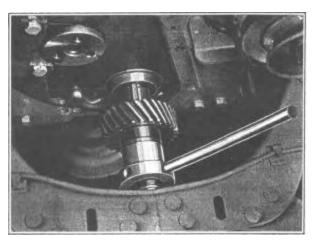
Crankshaft Gear and Vibration Dampener Replacer
